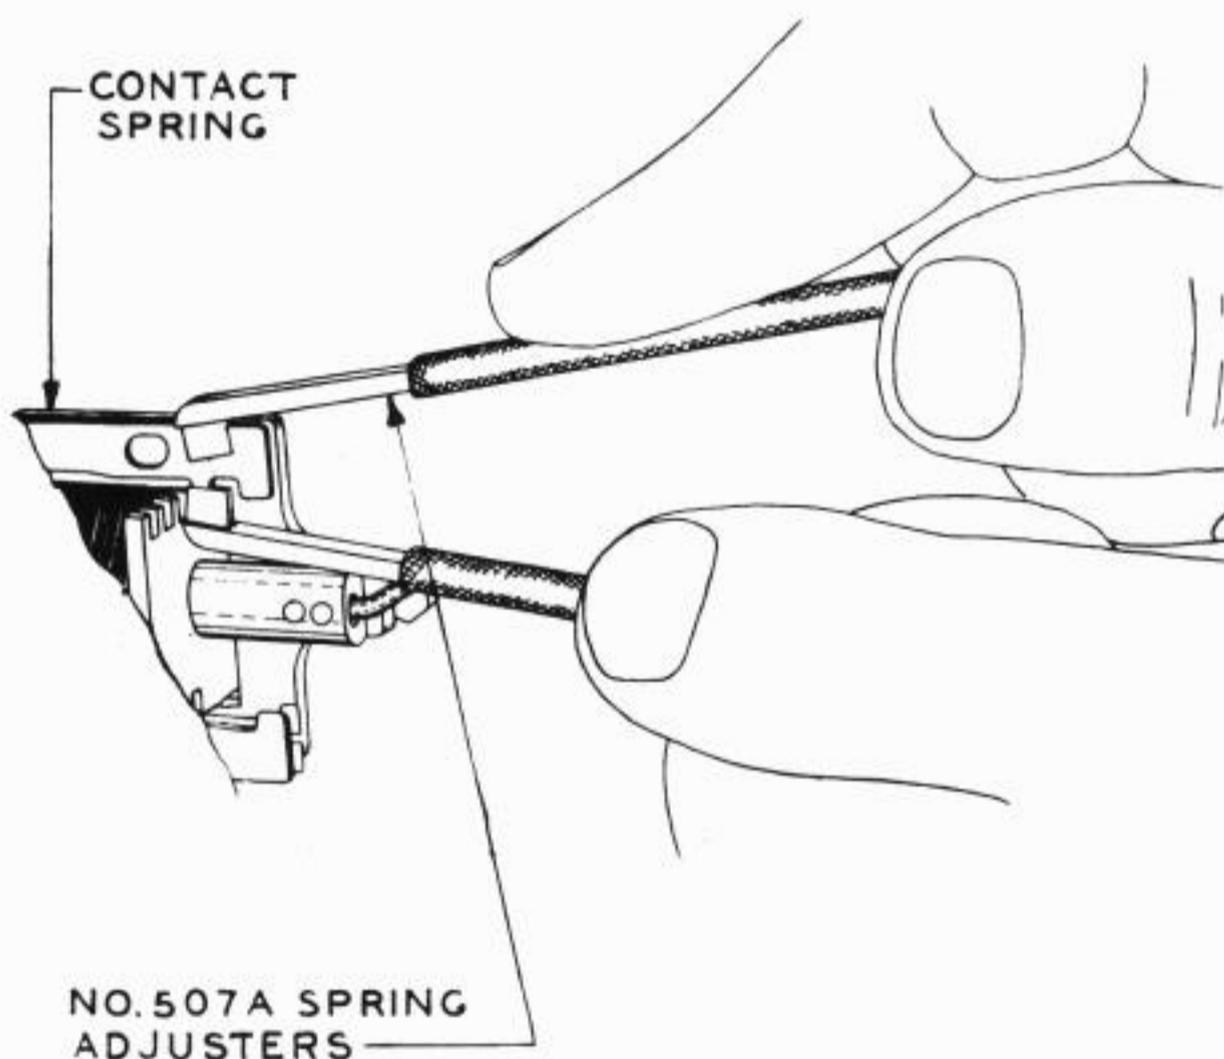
METHOD OF ADJUSTING SPRING TANG
